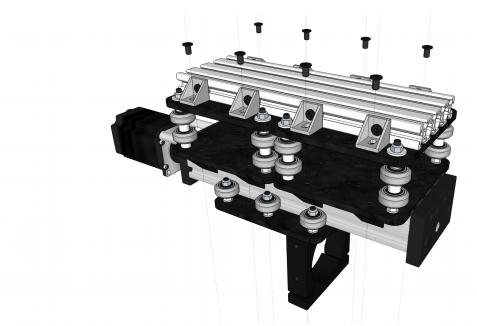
Assemble Z Axis: Install Backbone onto X Carriages
